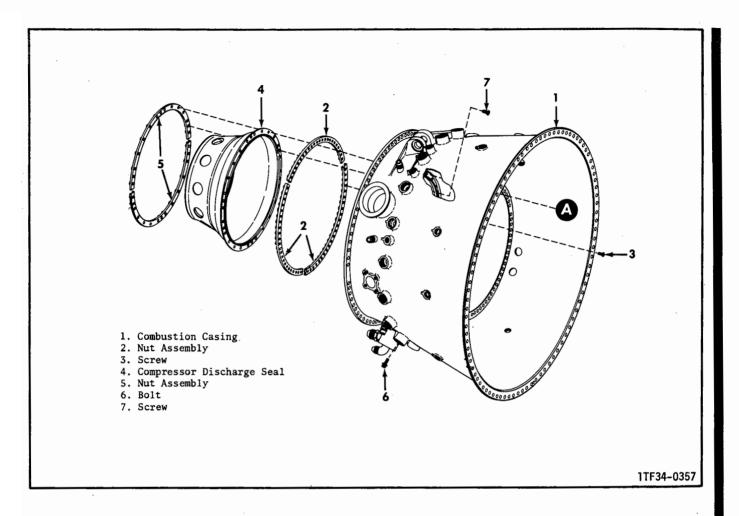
Disassembly of Combustion Chamber Module (Sheet 3 of 4)
